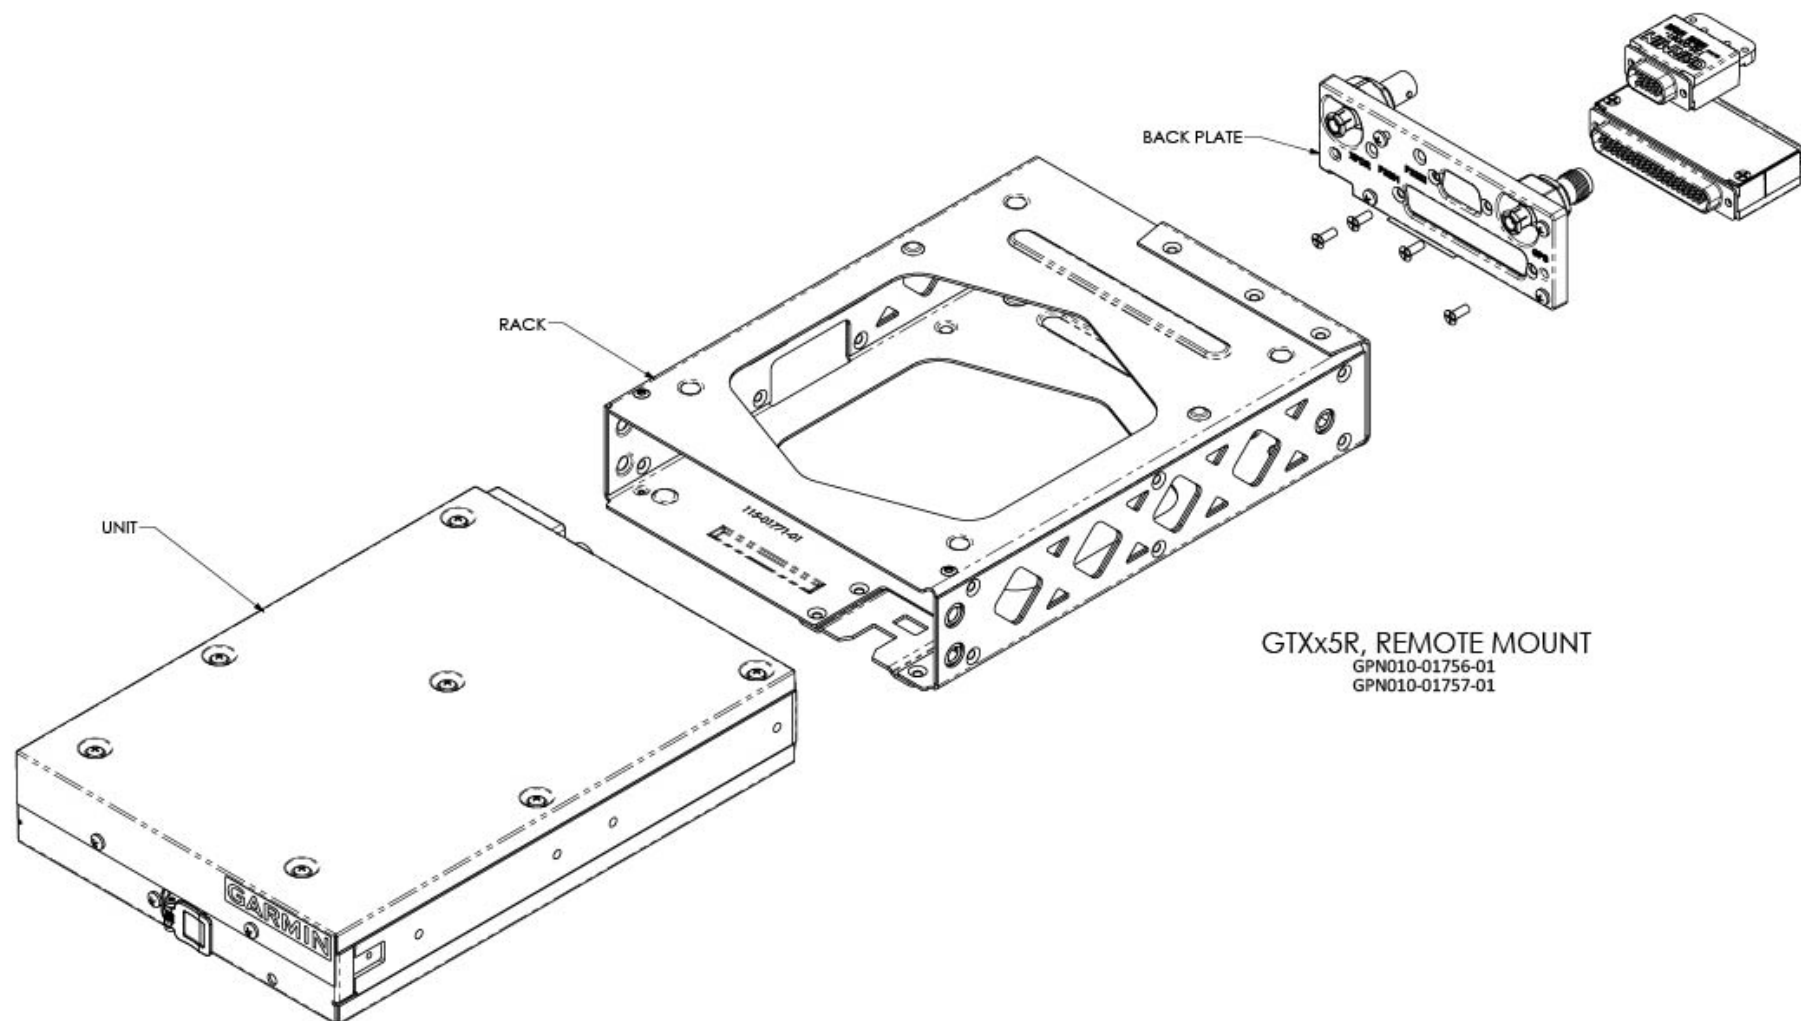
GTX 35R/45R Standard Remote Mount Assembly Shown
